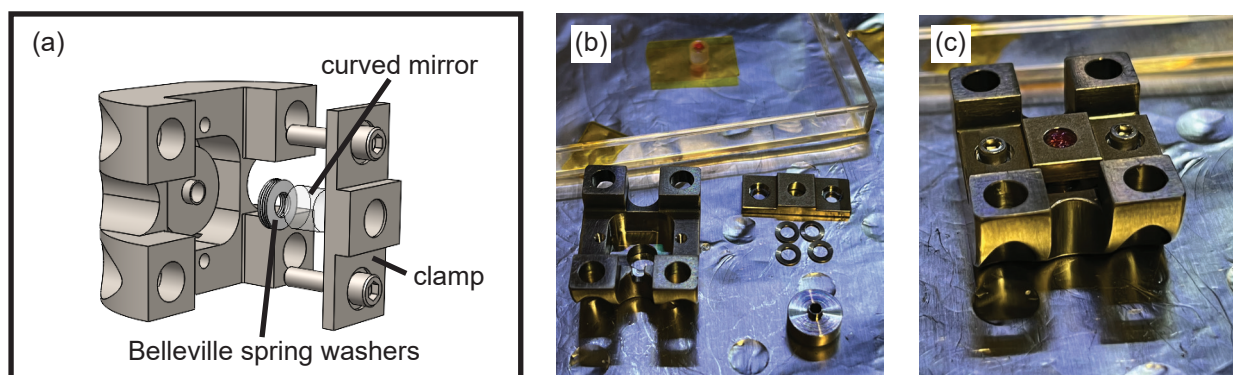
Spring-mounted mirror design (a) Computer Aided Design graphic illustrating the spring-mounted mirror design. The mirror substrate (transparent cylinder) is mounted to the curved mirror holder (dark gray) by being compressed against the spacer (light gray cylinder) and Belleville spring washers (annular disks) by the clamp bar (light gray) and fastened with screws as indicated. Springs are oriented such that the surface at the inner diameter of the spring exerts force against the mirror substrate. Assembly is aided by holding the spring washers in place gently with First Contact lens cleaning polymer, which can be easily and cleanly removed. This is the curved front mirror, and optical access is provided through the center holes in the spacer, springs and clamp. All metal parts are made from Invar other than the stainless steel screws and 302 stainless steel Belleville spring washers. (b) and (c) Photographs of parts before and after assembly, respectively. Device shown was assembled by Sarah Dickson.
